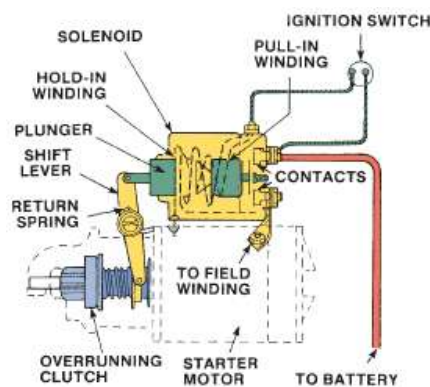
example of a solenoid-actuated starter where the solenoid mounts directly to the starter motor.
